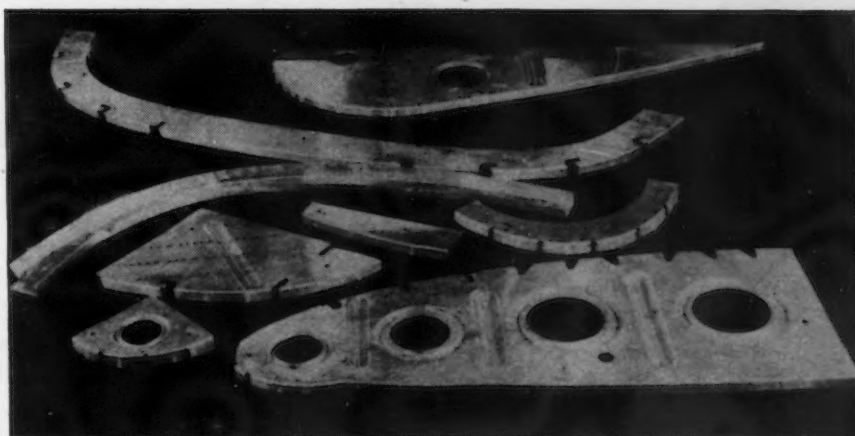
Frame and rib sections typical of the types of parts which can be formed with located wrinkles.
